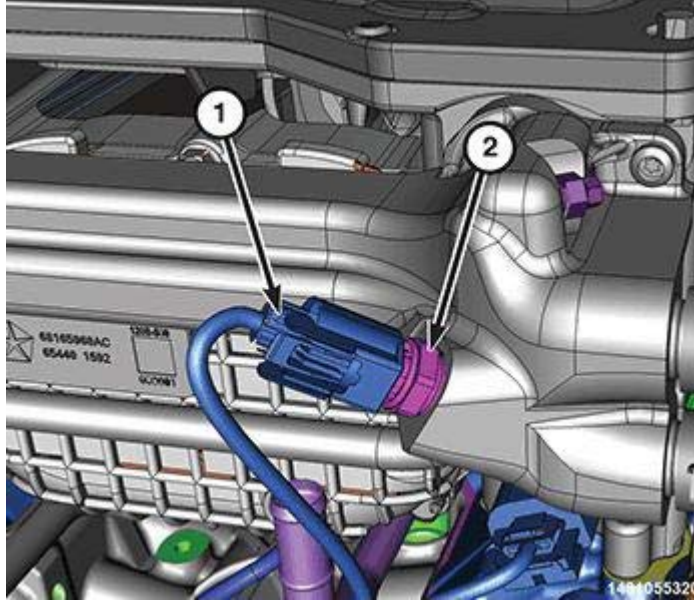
Charger Air Cooler Temperature Sensor & Wire Harness Connector
